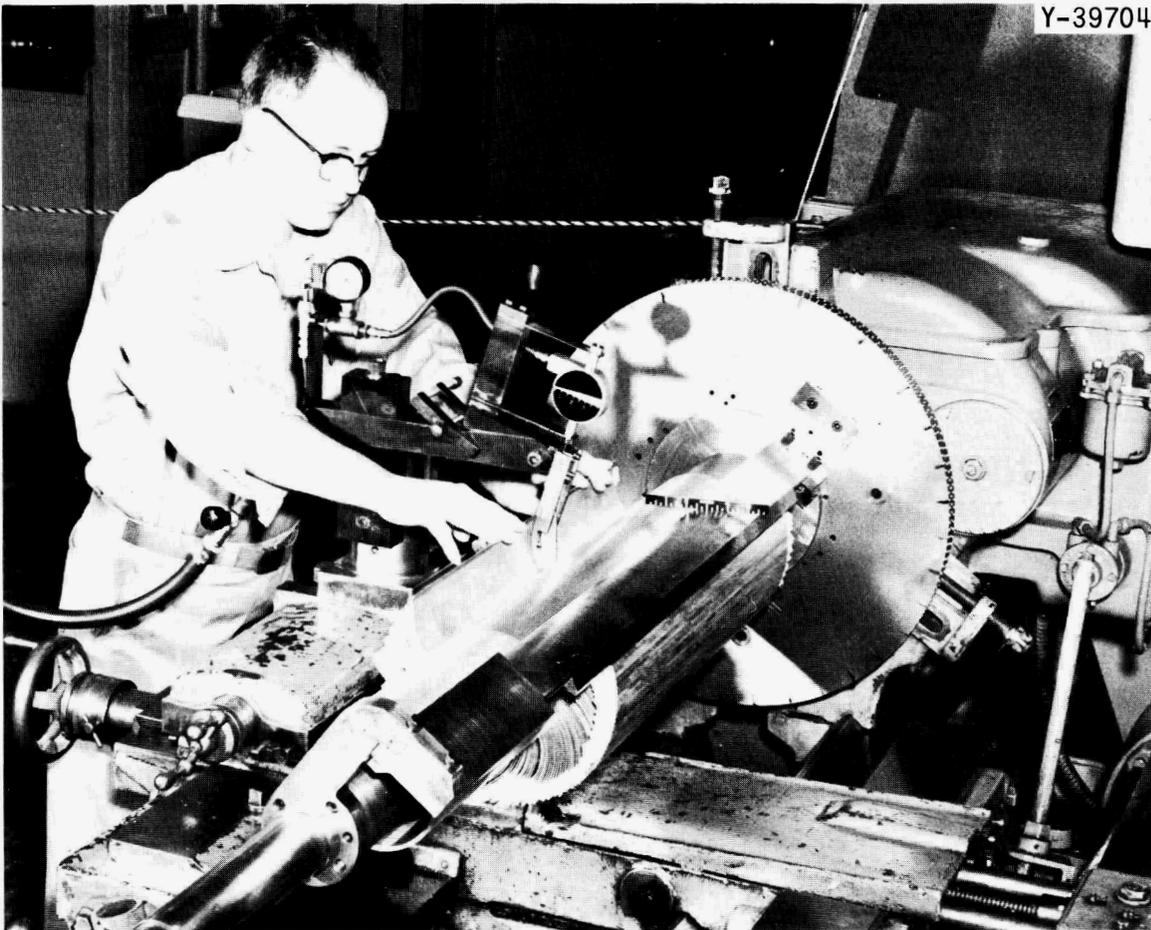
Setup for Assembling and Peening Plates Into Fuel Arrays.
